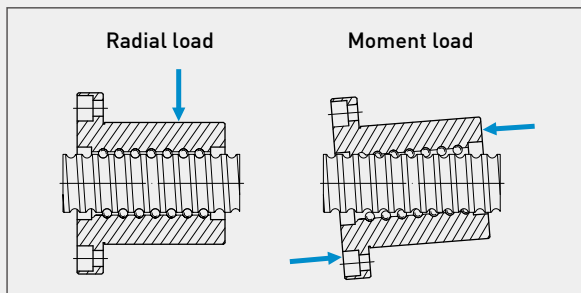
(a) Unbalance load caused by misalignment of the support bearings and nut brackets, inaccurate alignment of the guide surface, inaccurate angle or alignment of the nut mounting surface
